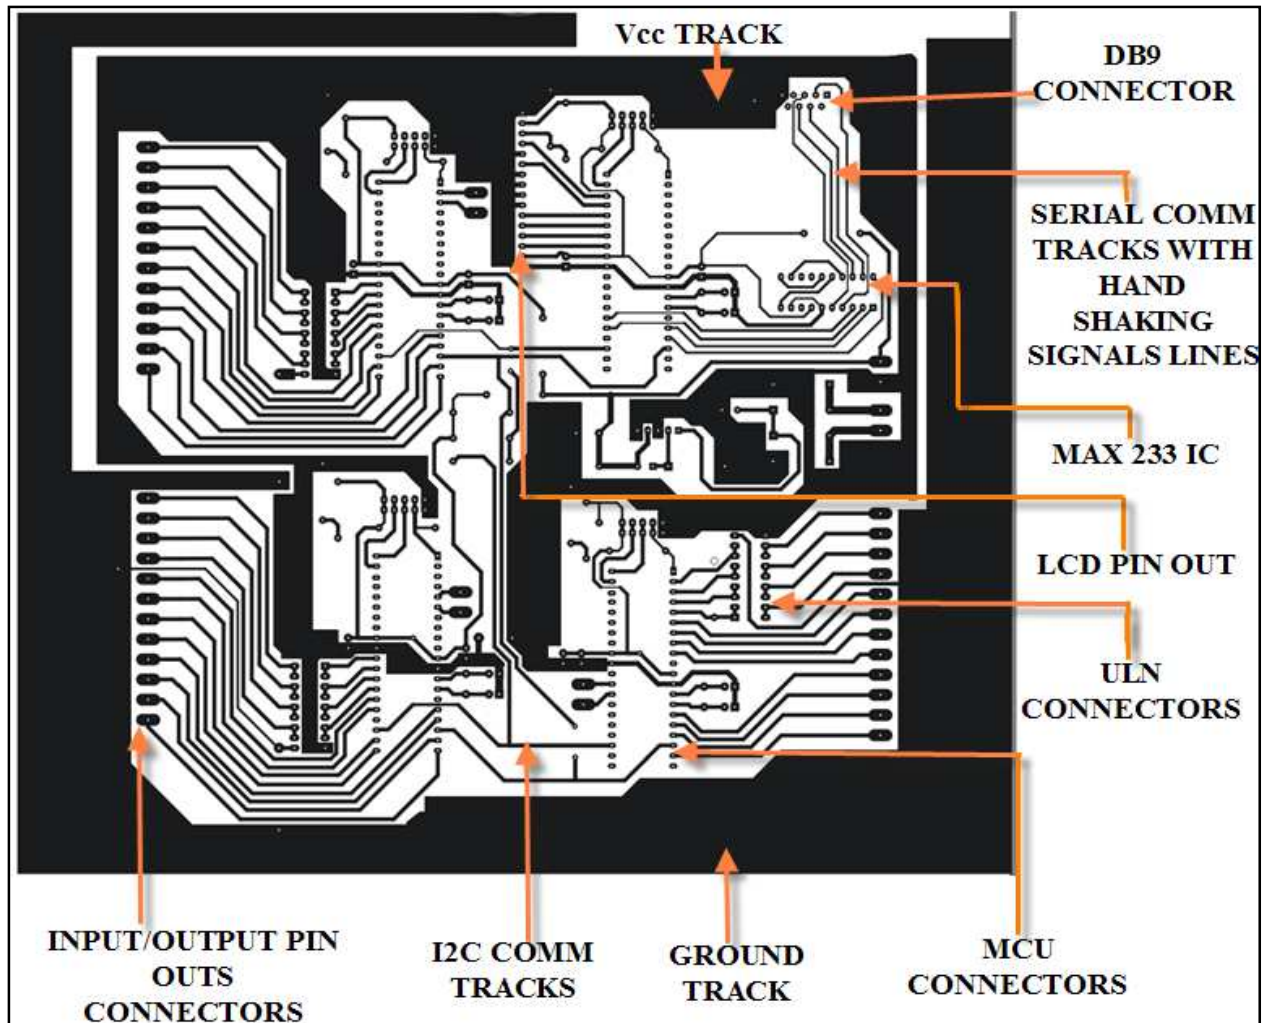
PCB of OAC Designed in OrCAD Layout.
